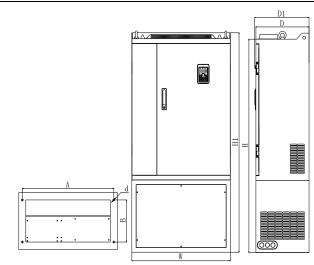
250kW~400kW G3 (Base with DC reactor) Outline dimension
